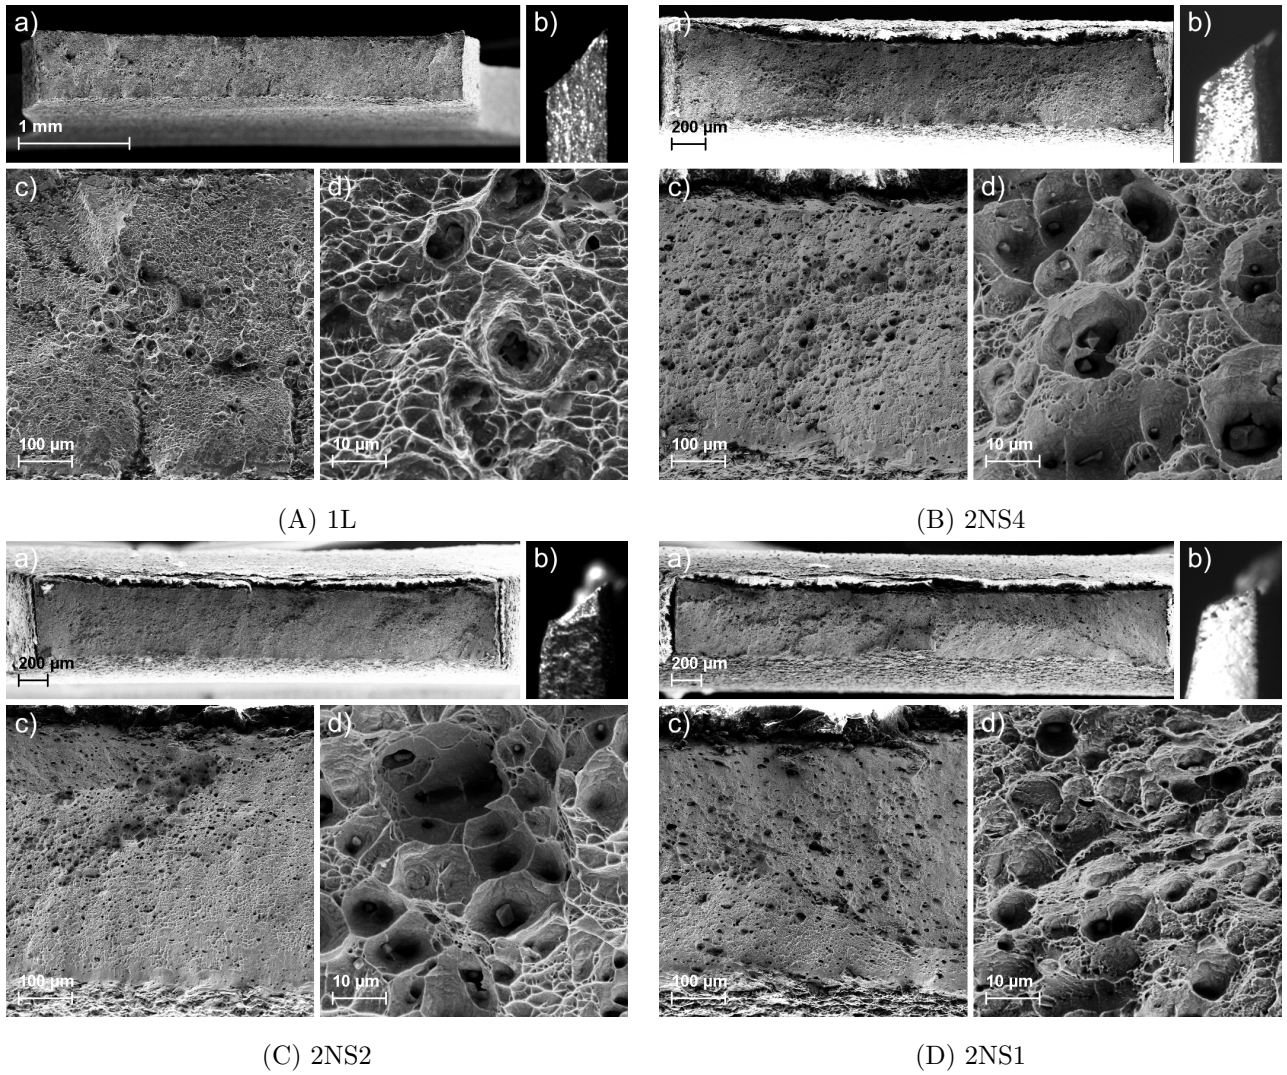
Micrographs of the fracture surface in the plate specimens. In each sub-figure, the top-left figure (a) corresponds to the overall view of the fracture surface and the top-right figure (b) shows a side-view of the whole fractured specimen. The bottom-left figure (c) and bottom-right figure (d) correspond to the fracture surface at higher magnification.
